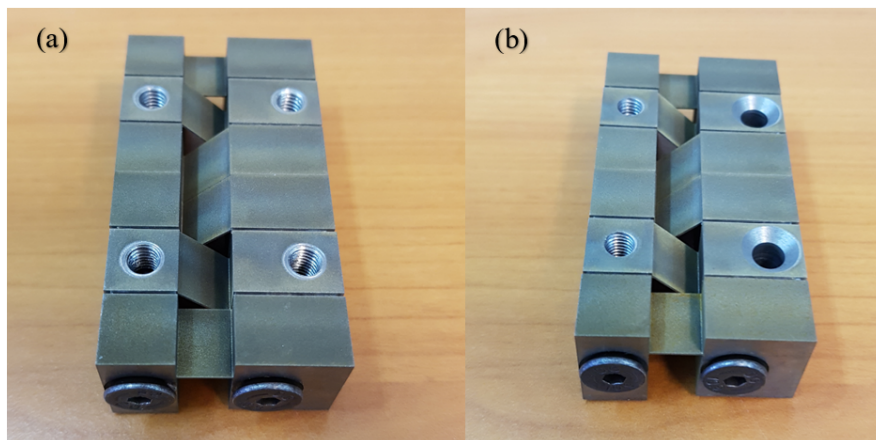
Cross and straight flexure assembly used in a) top quarter, b) bottom quarter.
